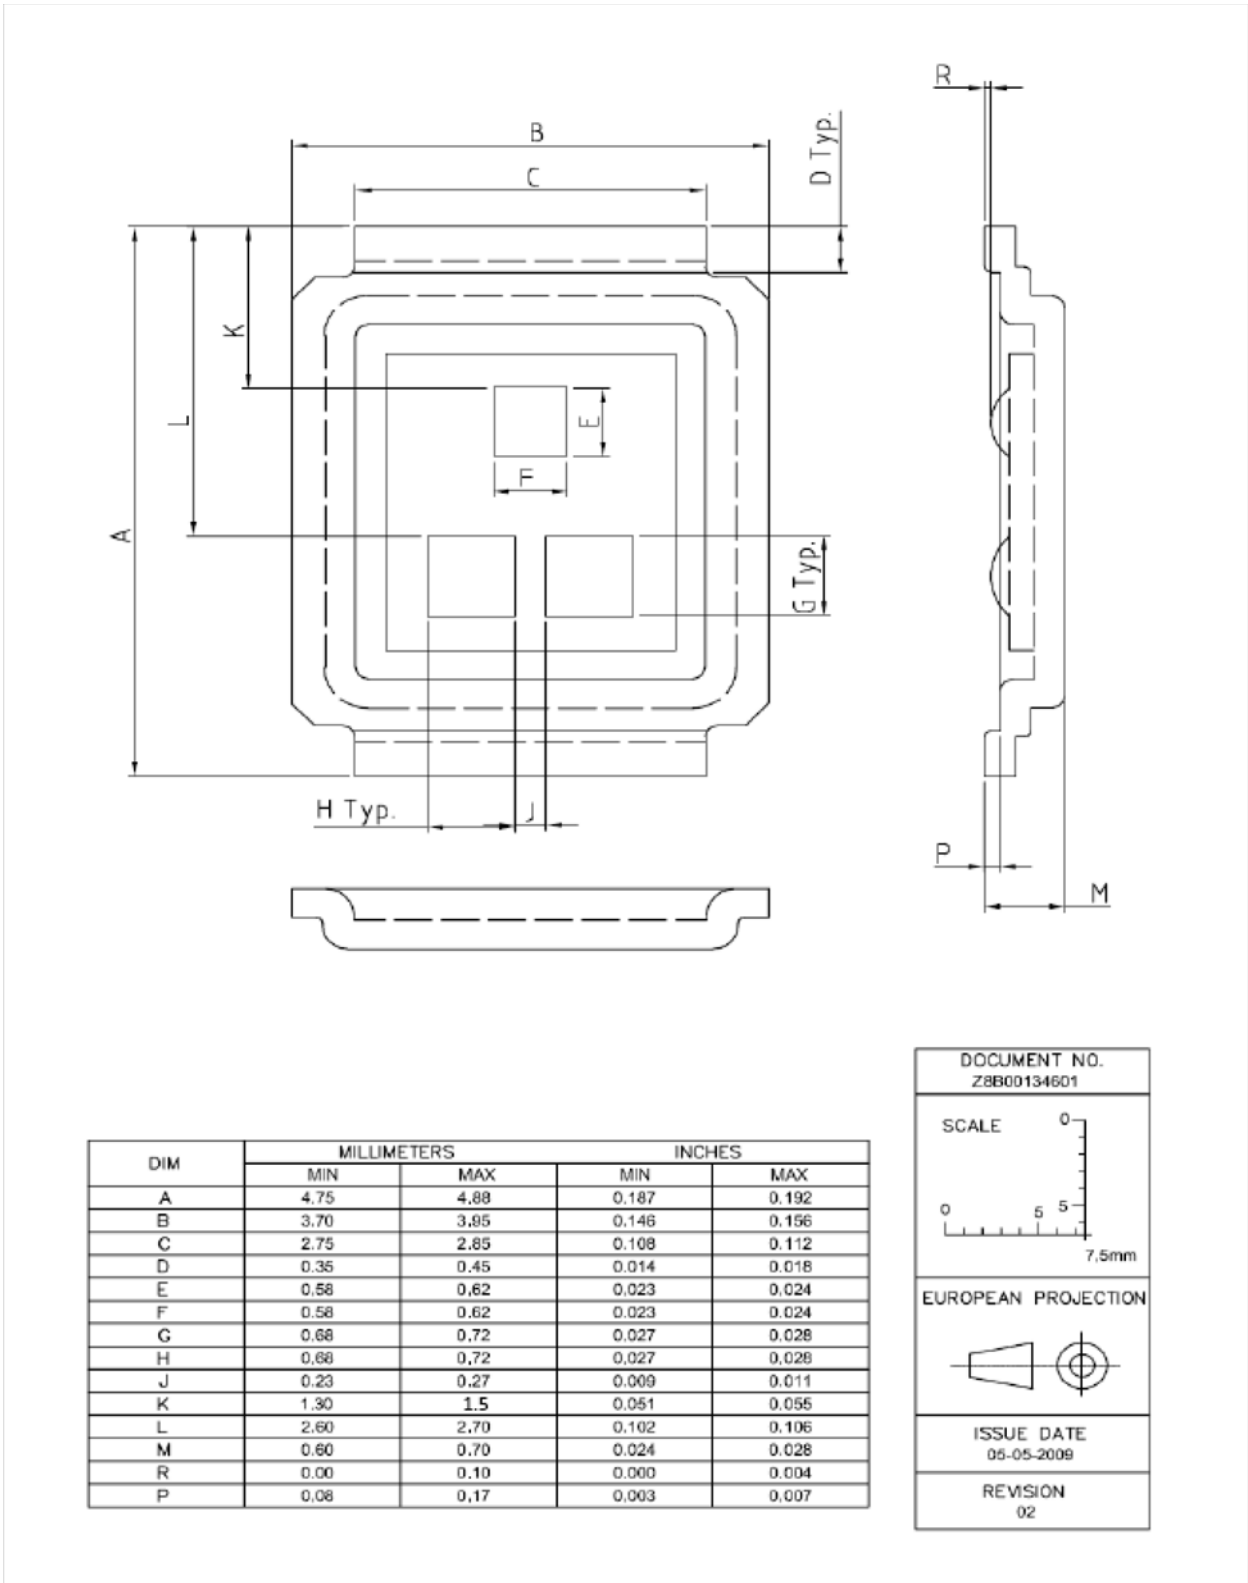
Outlines MG-WDSO-2, dimensions in mm/inches
